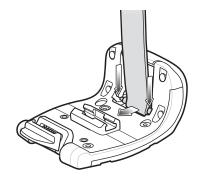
Remove Finger Wedge (Trigger Swivel Assembly with Cam Buckle)
